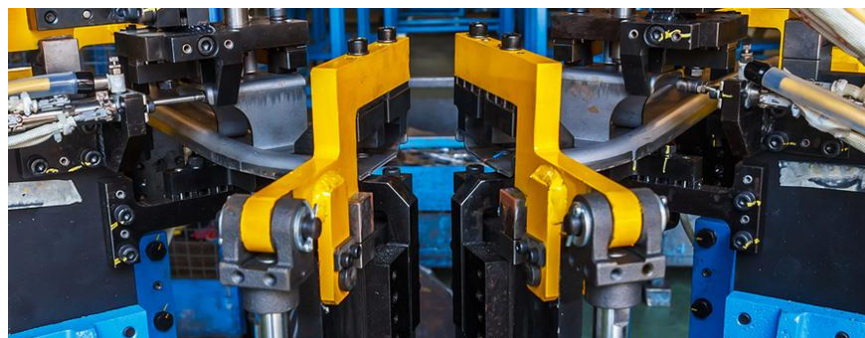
Welding jig (source: Tulsa Welding School)
